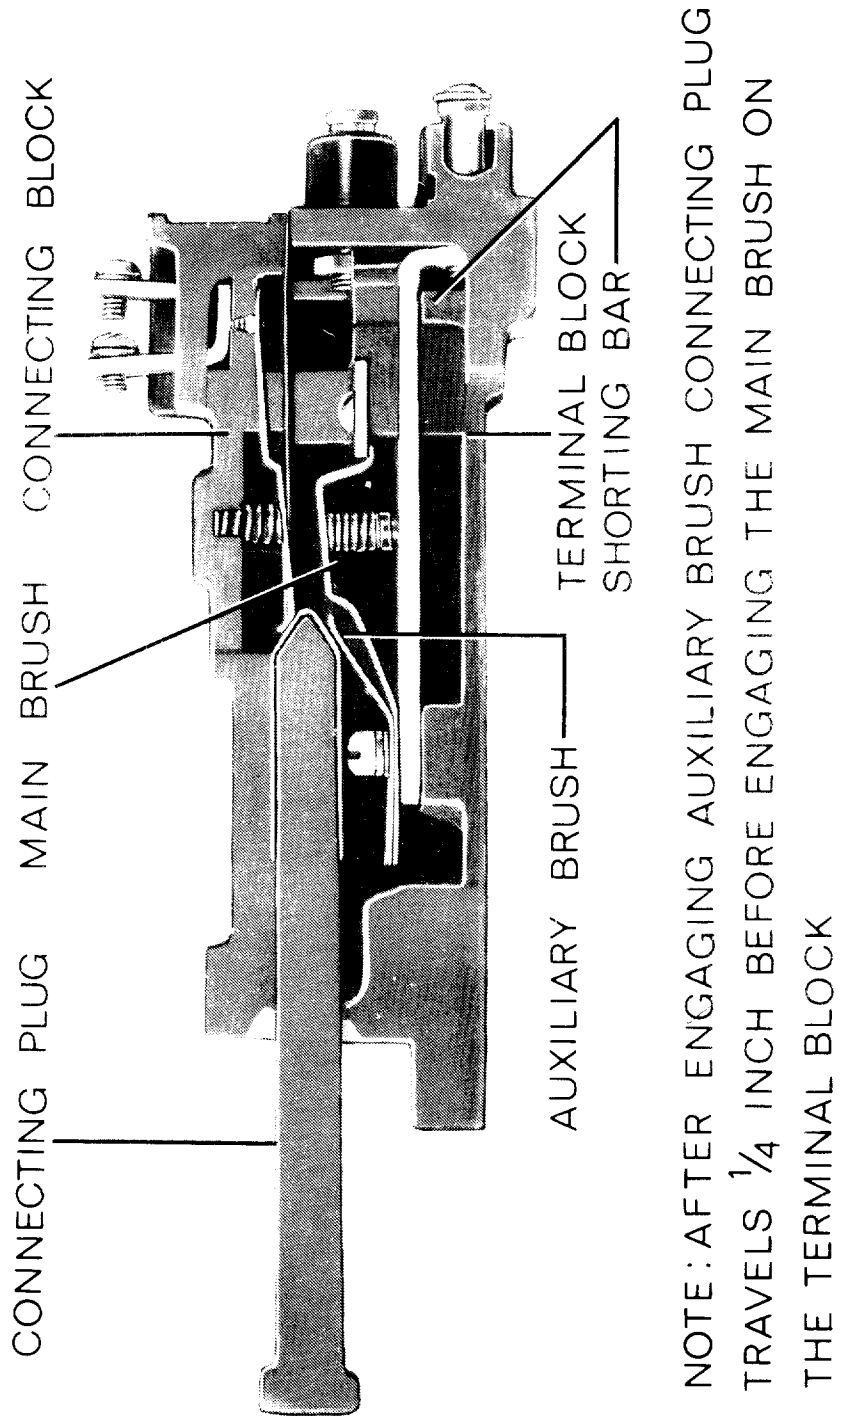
(8025039) Cross Section of Drawout Case Showing Position of Auxiliary Brush
